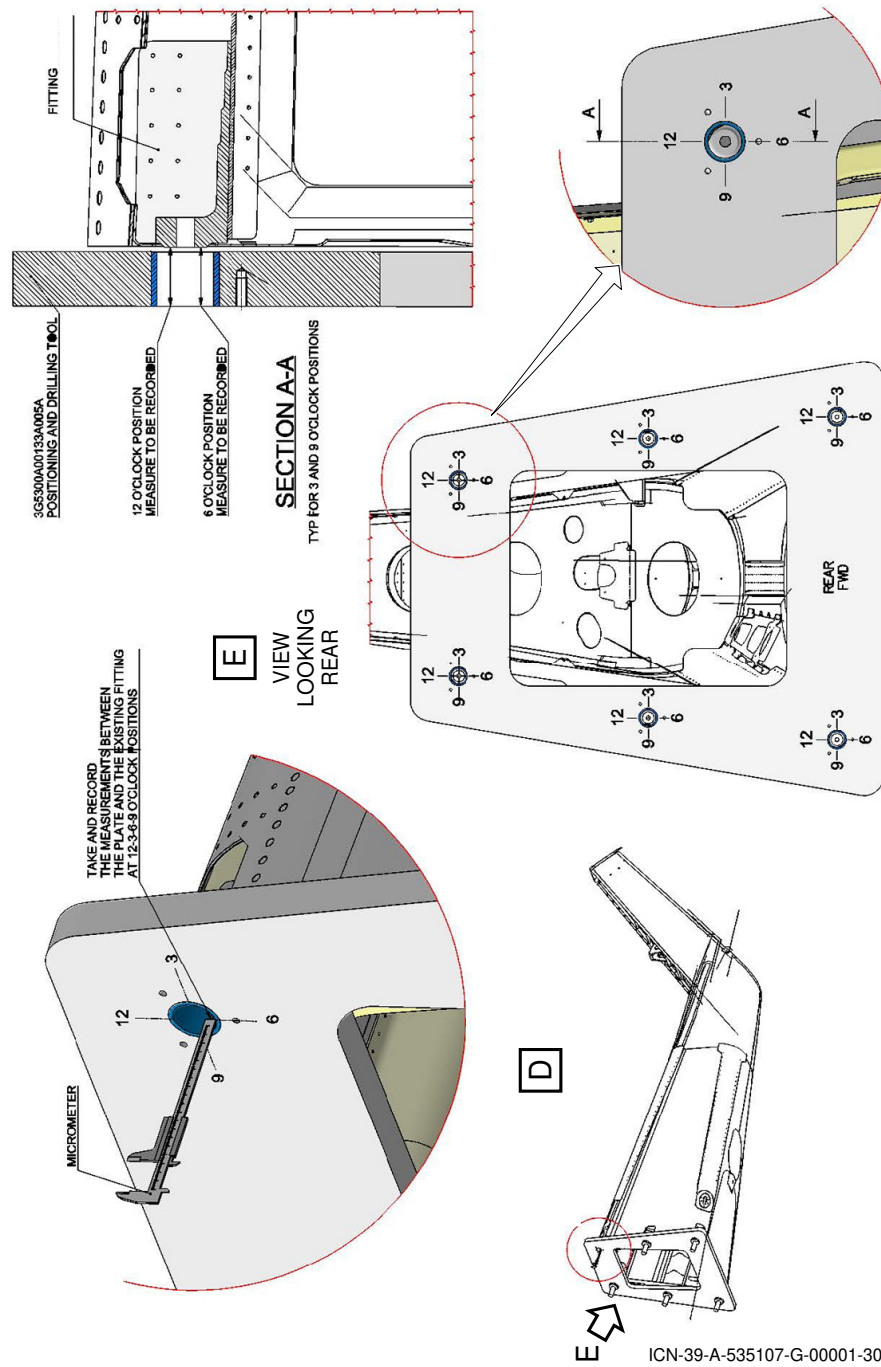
(Sheet 3 of 10) Use of the positioning and drilling tool kit
